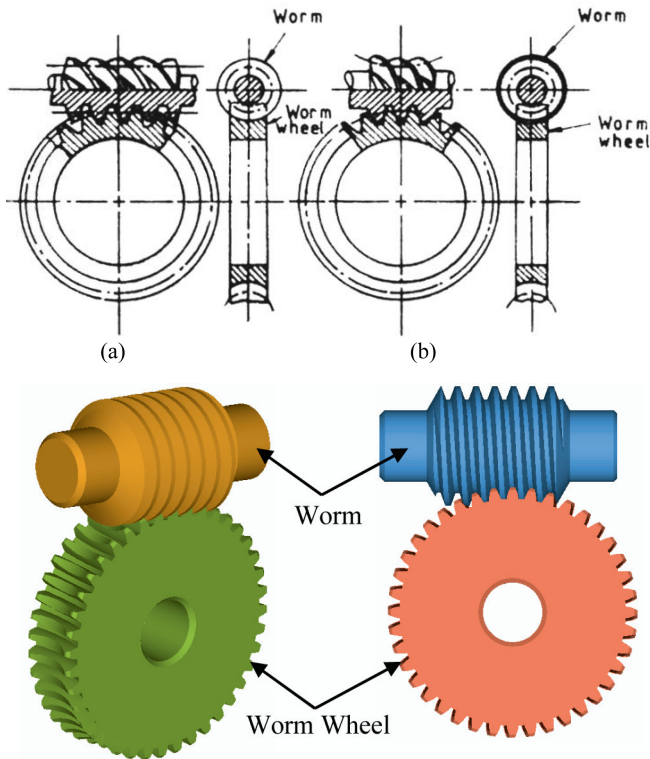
Worm gears. (a) Straight worm. (b) Enveloping worm
